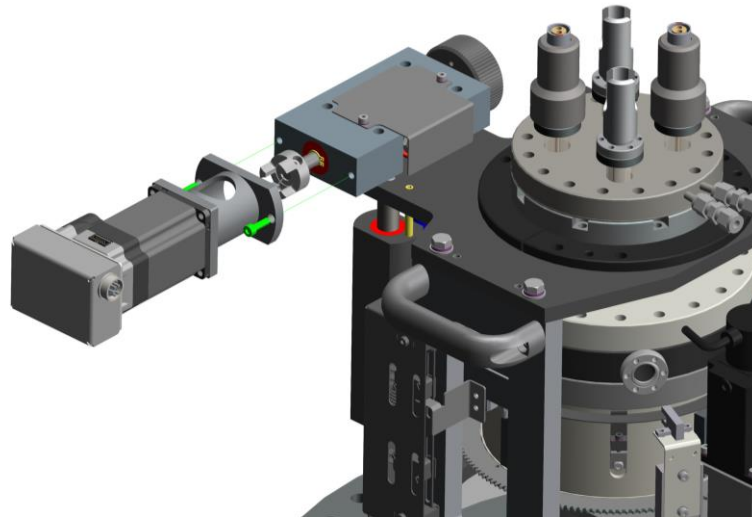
Schematic showing the removal of Z-motion (Fork) stepper motor from the manipulator (automated transfer system).
